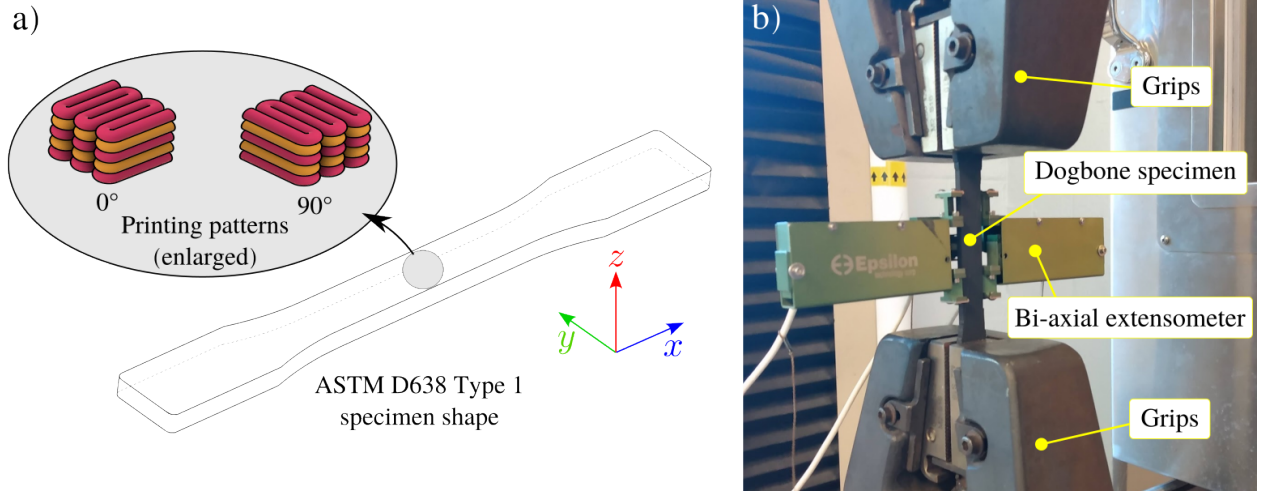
Specimen geometry and tensile testing setup. a) Schematic representation of the printing patterns used to produce the ASTM 638 Type 1 specimens. Two printing patterns were considered, either with all print passes aligned with the long axis ( $0^\circ$  pattern, along the  $x$ -direction) or with passes along the  $y$ -direction, or  $90^\circ$  pattern. b) Specimen mounted in tensile testing machine, with extensometer attached.
